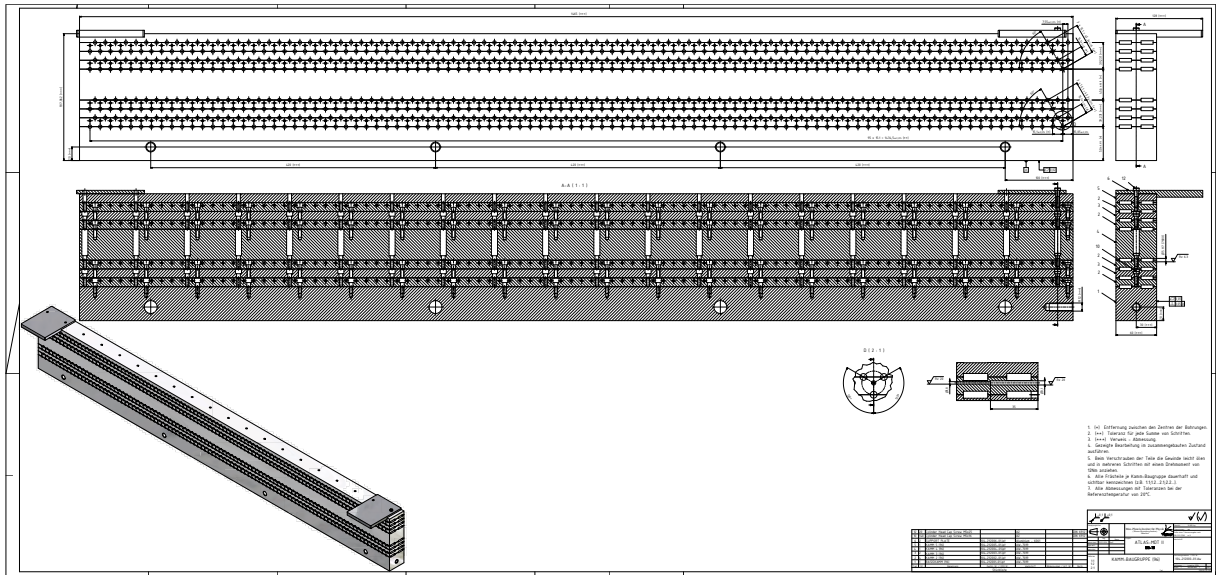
Drawing of the assembly jig for the BIS 1-8 chambers with the precision machined hole grids for the insertion of the endplugs of the drift tubes.
